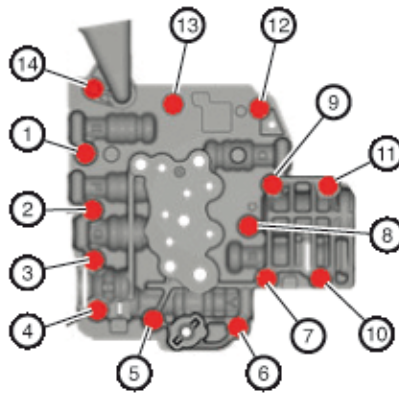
Control Valve Body Bolt And Fluid Transfer Pipe Bolt Tightening Sequence
